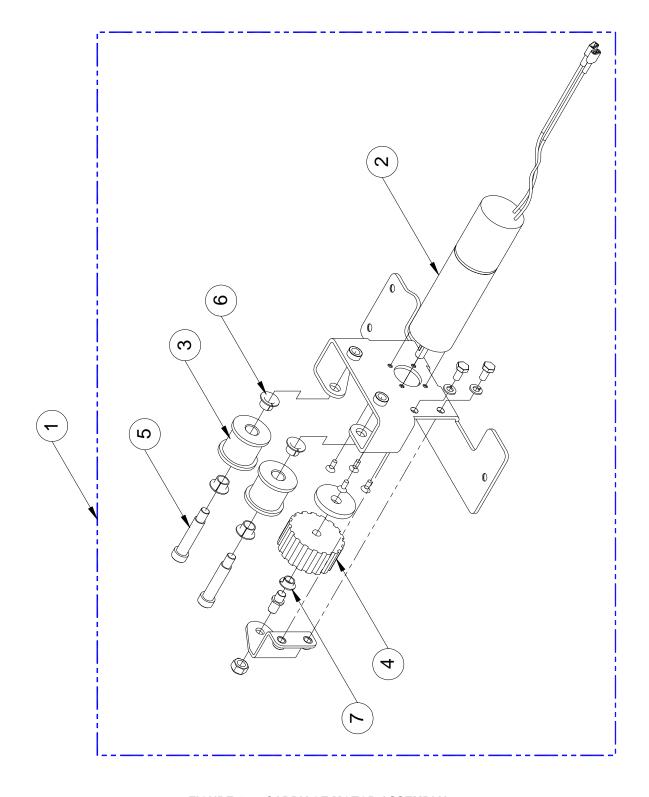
CARRIAGE MOTOR ASSEMBLY
